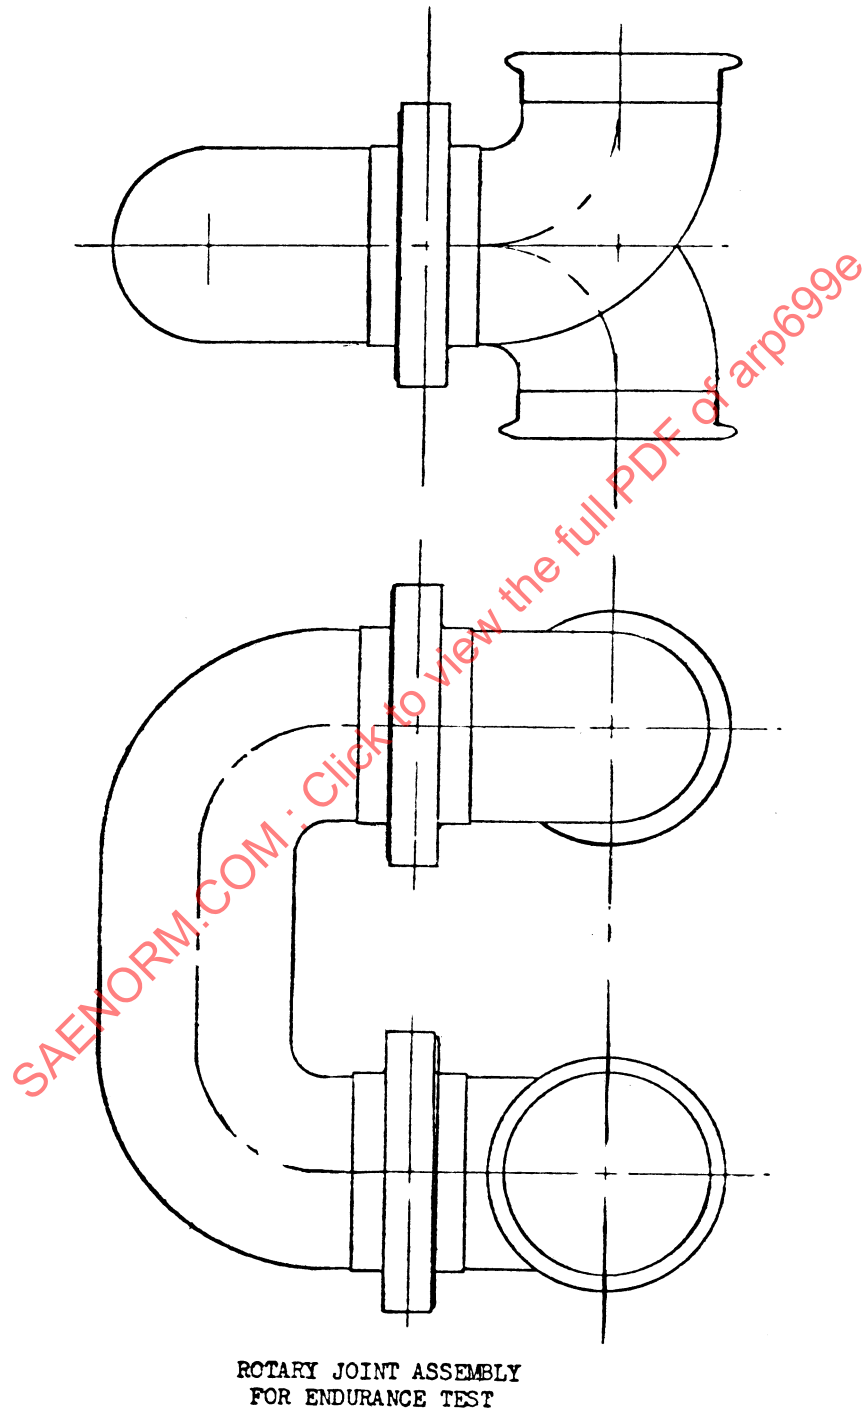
Rotary Joint Assembly for Endurance Test
